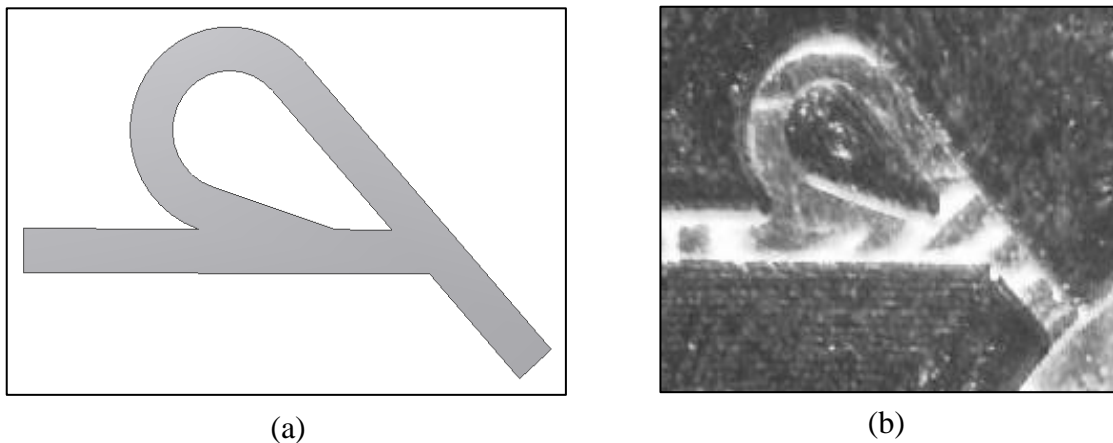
The milling machine limitation effect on the structures. (a) The optimum design shape of the Tesla-type valve, after reference [27] and (b) the Tesla-type valve obtained with the milling machine used.
